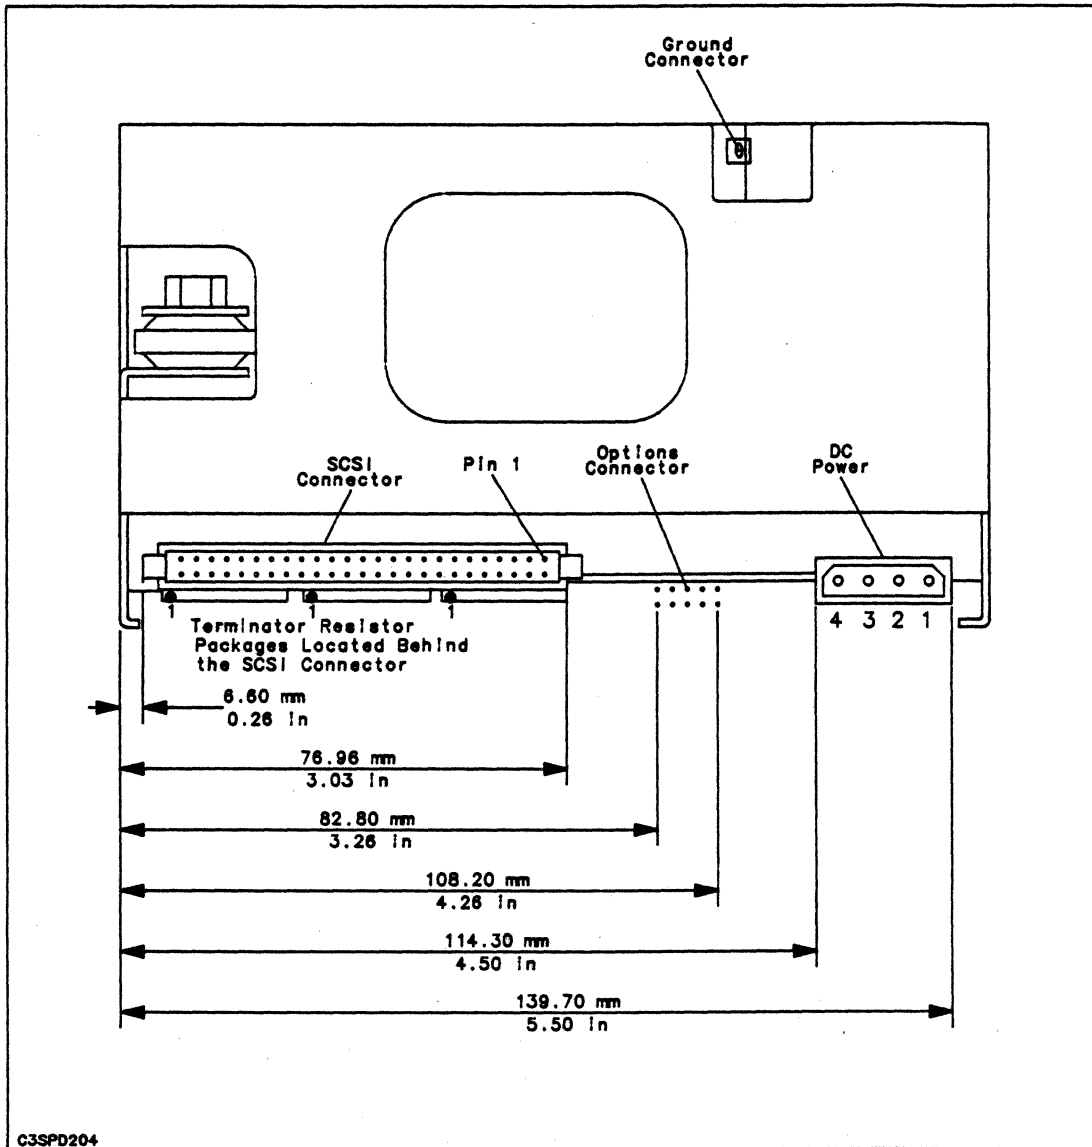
Connector Physical Dimensions, Differential Drives.
